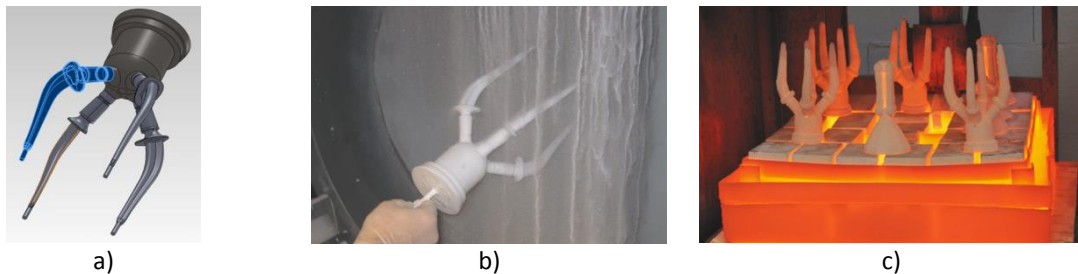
Ceramic shell manufacturing; a) Models built using CAD software; b) Sand shower to coat the SL-assembly; c) Burning process to eliminate the resin ashes.
